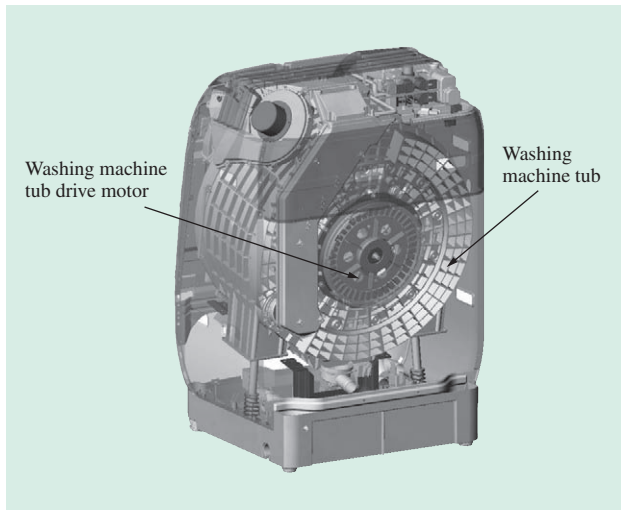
Structure Image of Front-loading Washer Dryer. The drive motor is located at the bottom of the washing machine tub.
